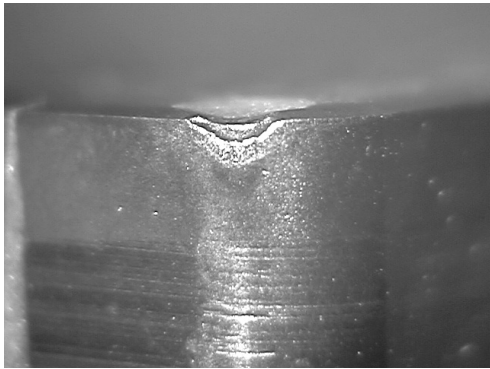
Flank wear on CBN cutting tool(feed rate = 0.157mm/rev, cutting depth = 0.1mm, cutting speed = 72m/min)
